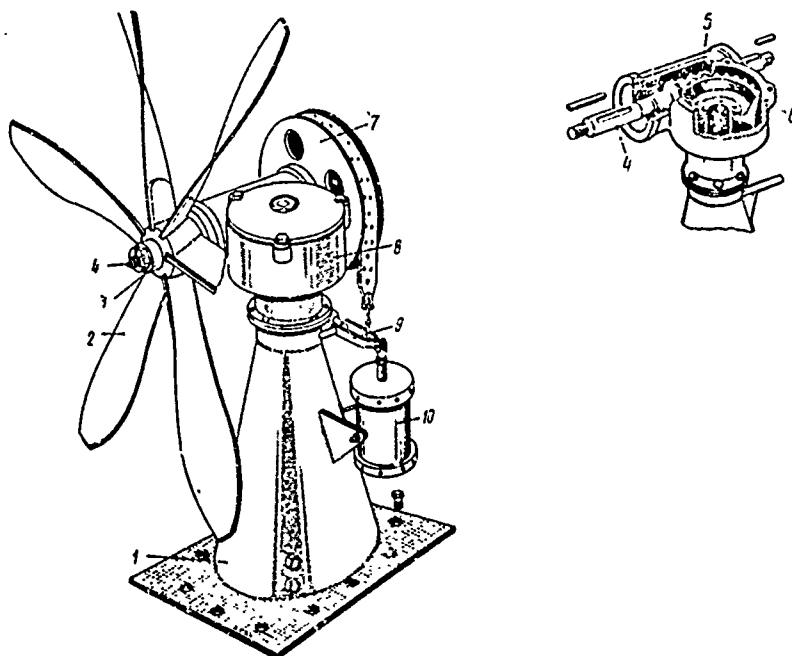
Air vane with reduction gear: 1 - column of air vane; 2 - air vane; 3 - nut-puller; 4 - shaft of worm; 5 - worm; 6 - worm gear; 7 - brake pulley; 8 - housing for worm reducer; 9 - brake lever; 10 - pneumatic cylinder.
